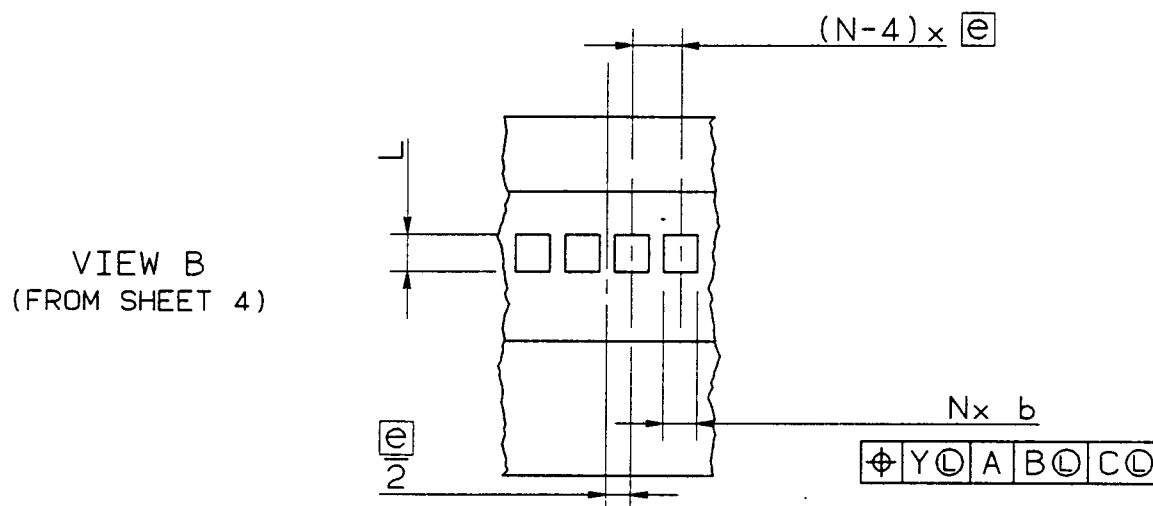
DETAIL, SECTION AND TRUE POSITION CALLOUTS
